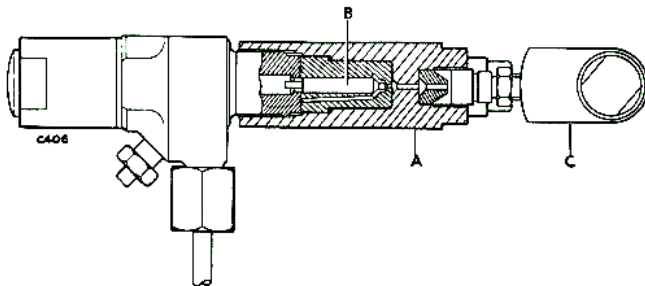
Sectioned view of adaptor (C.A.V.-E.T. 872).
